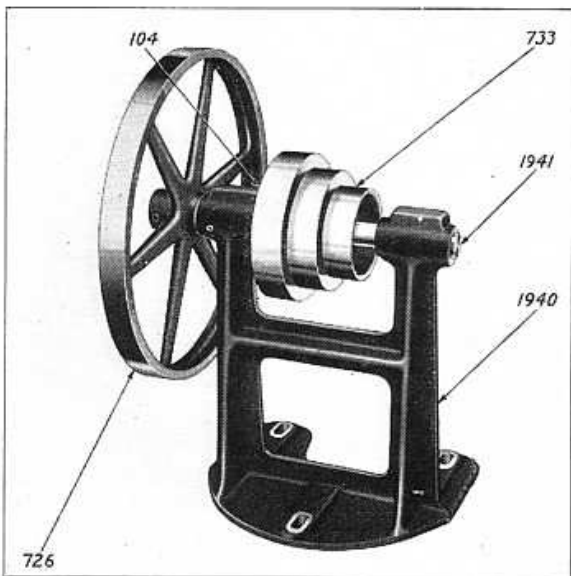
Horizontal V-Belt Countershaft, Plain Type.
